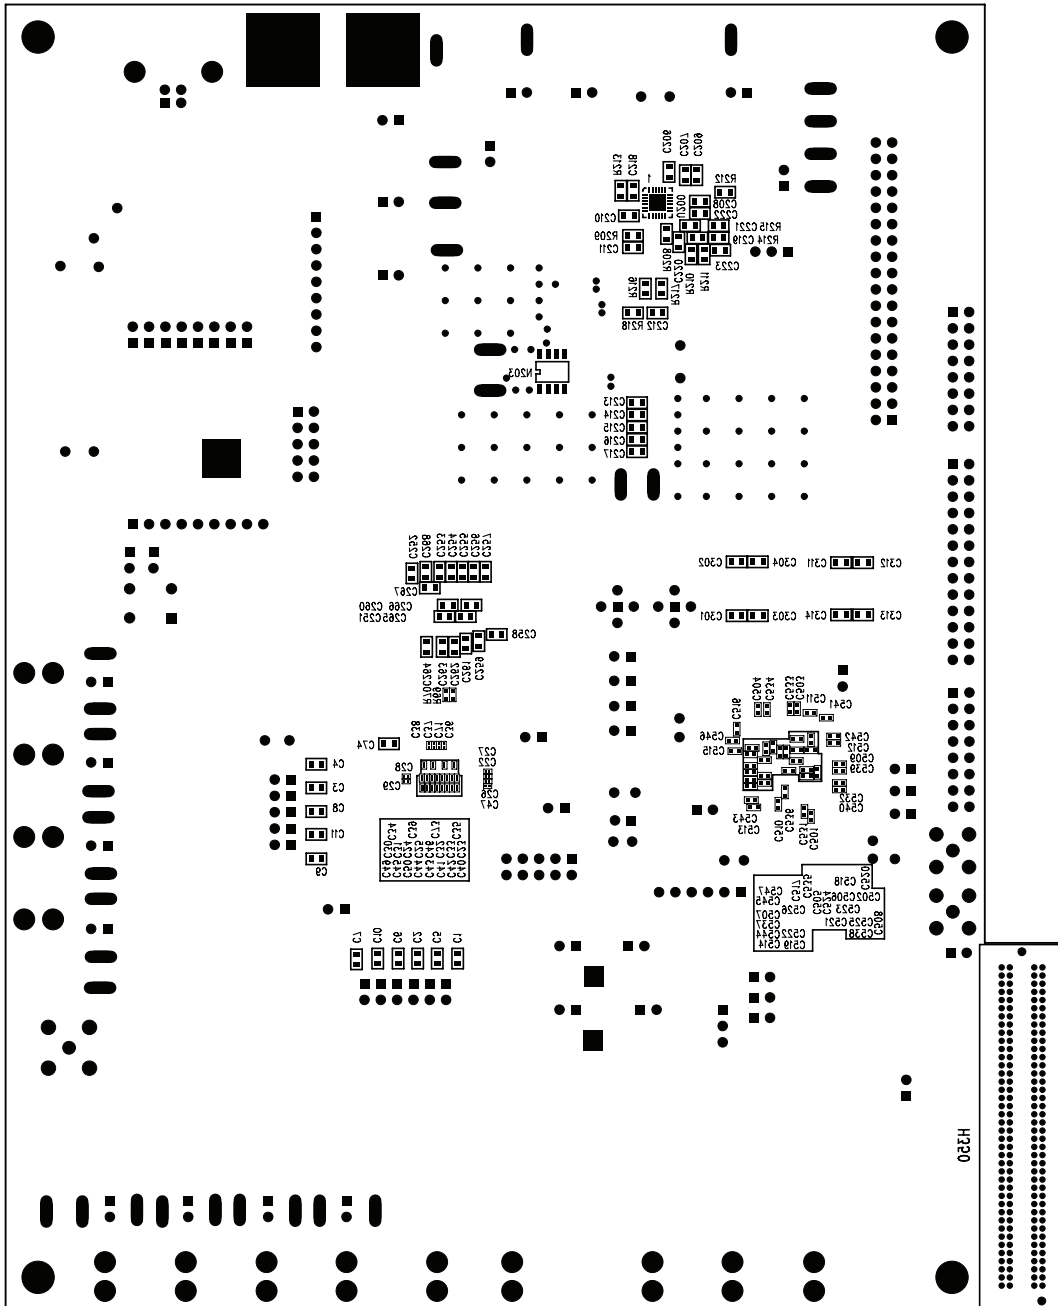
MAX9530 EV Kit Component Placement Guide—Solder Side
